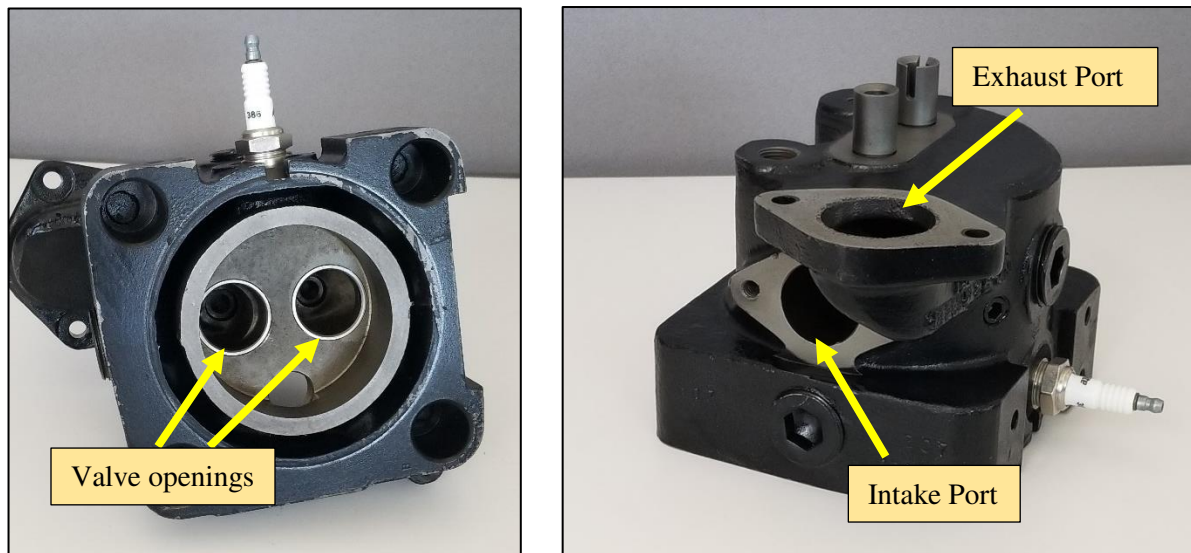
Images of the CFR head replica. Bottom view of the head (left), an isometric view of the head (right)
